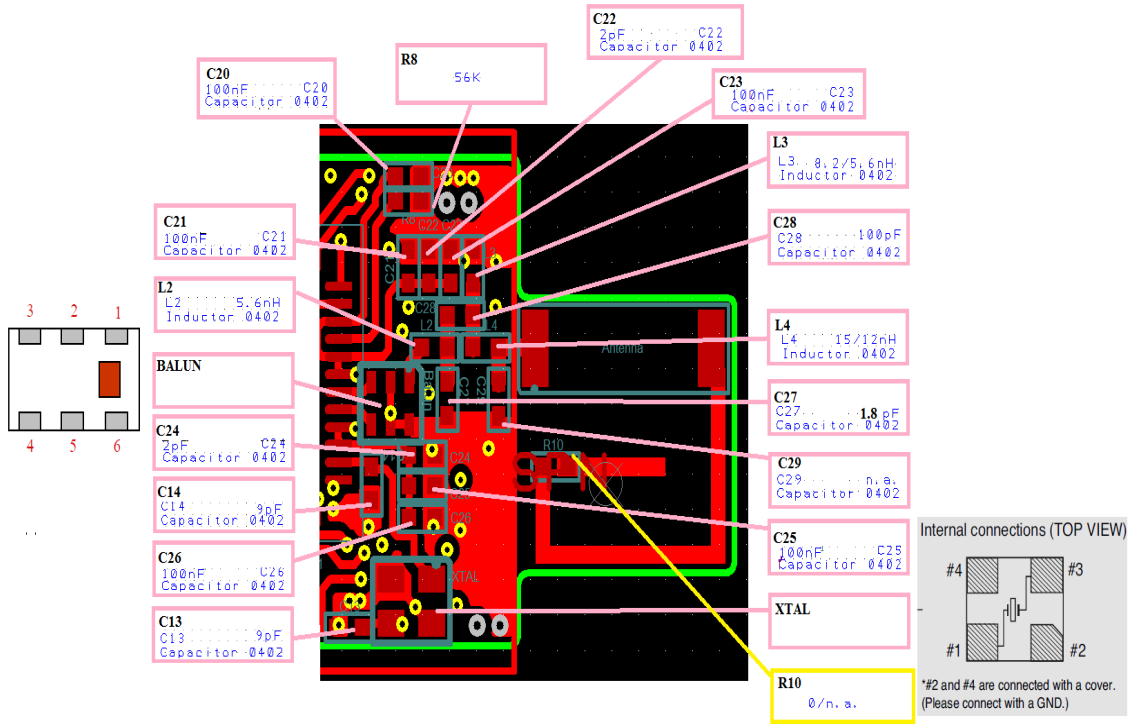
Radio components placed in the top layer of the eight channelled telemetry unit of dimension 24 mm x 13 mm
